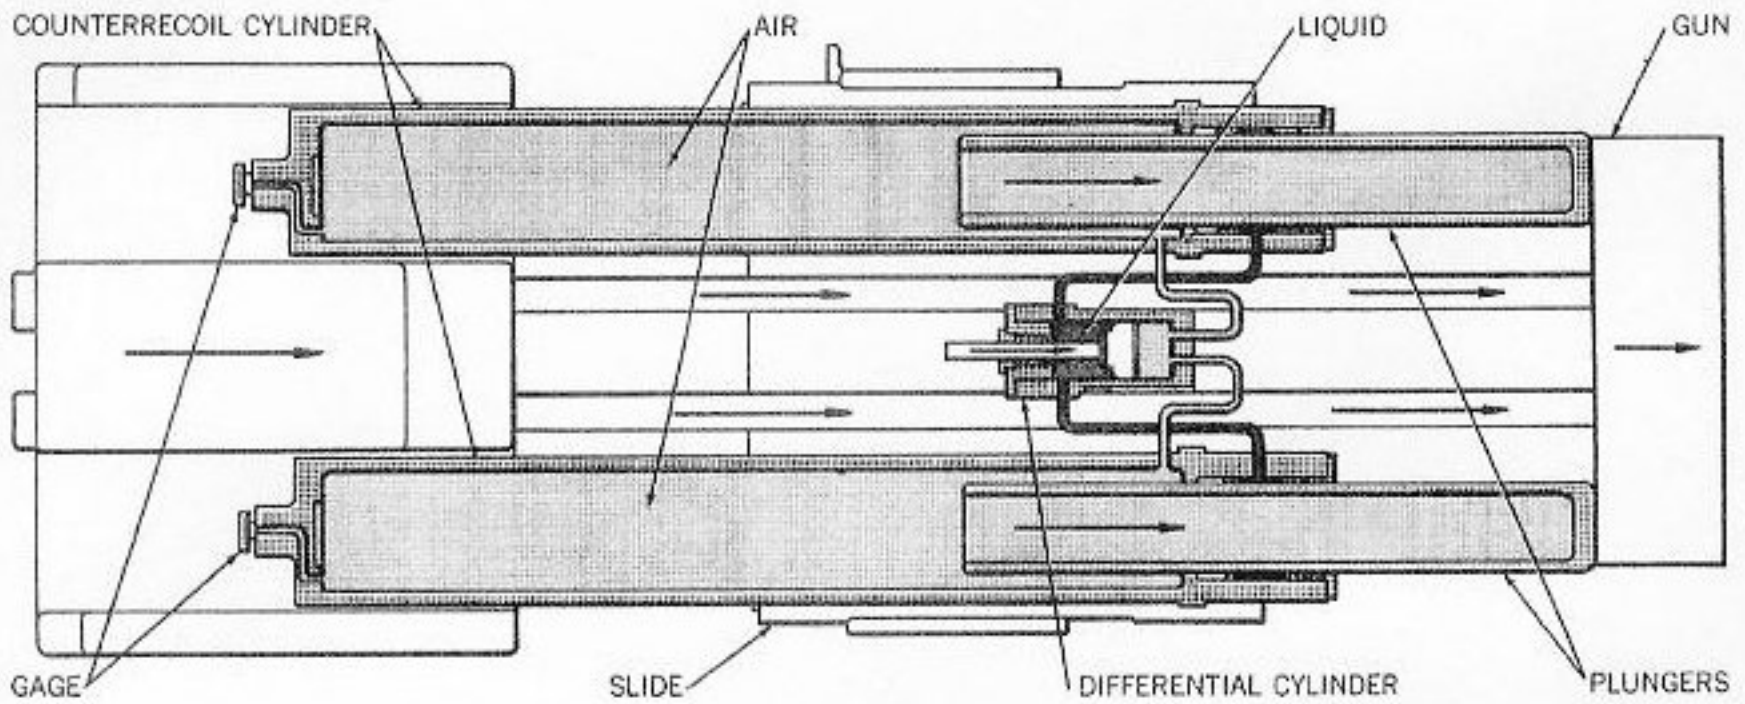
C. 16-inch Gun Assemblies, Counterrecoil Action.
